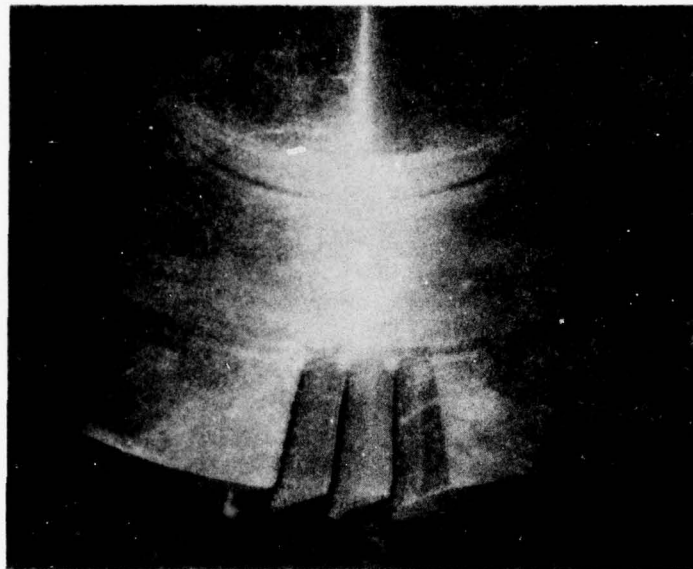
Second Bonded Wheel Blank Rotor Assembly with Sample Machined Blades. Trailing-Edge Side of the Wheel.
